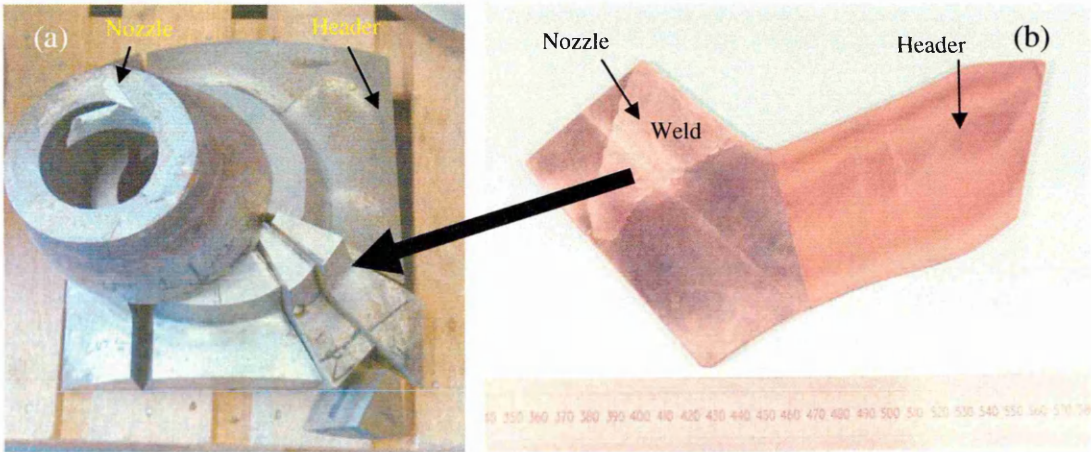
Photographs of ex-service Type 316H stainless steel weldment (Weld-1) showing: (a) weld location on the component, and (b) the weld profile.
